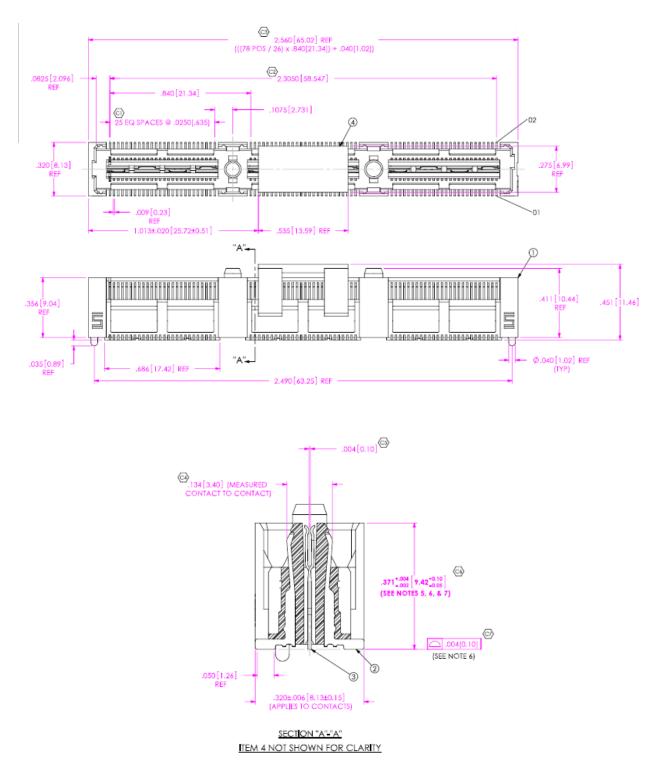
Standard ASP-129646-03 or equivalent Mechanical Drawings
